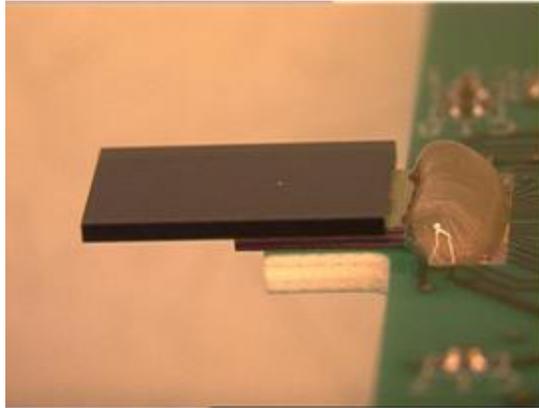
Photo of a hybrid-bonded photonic chip and VLSI chip wire-bonded to a test PCB board.
